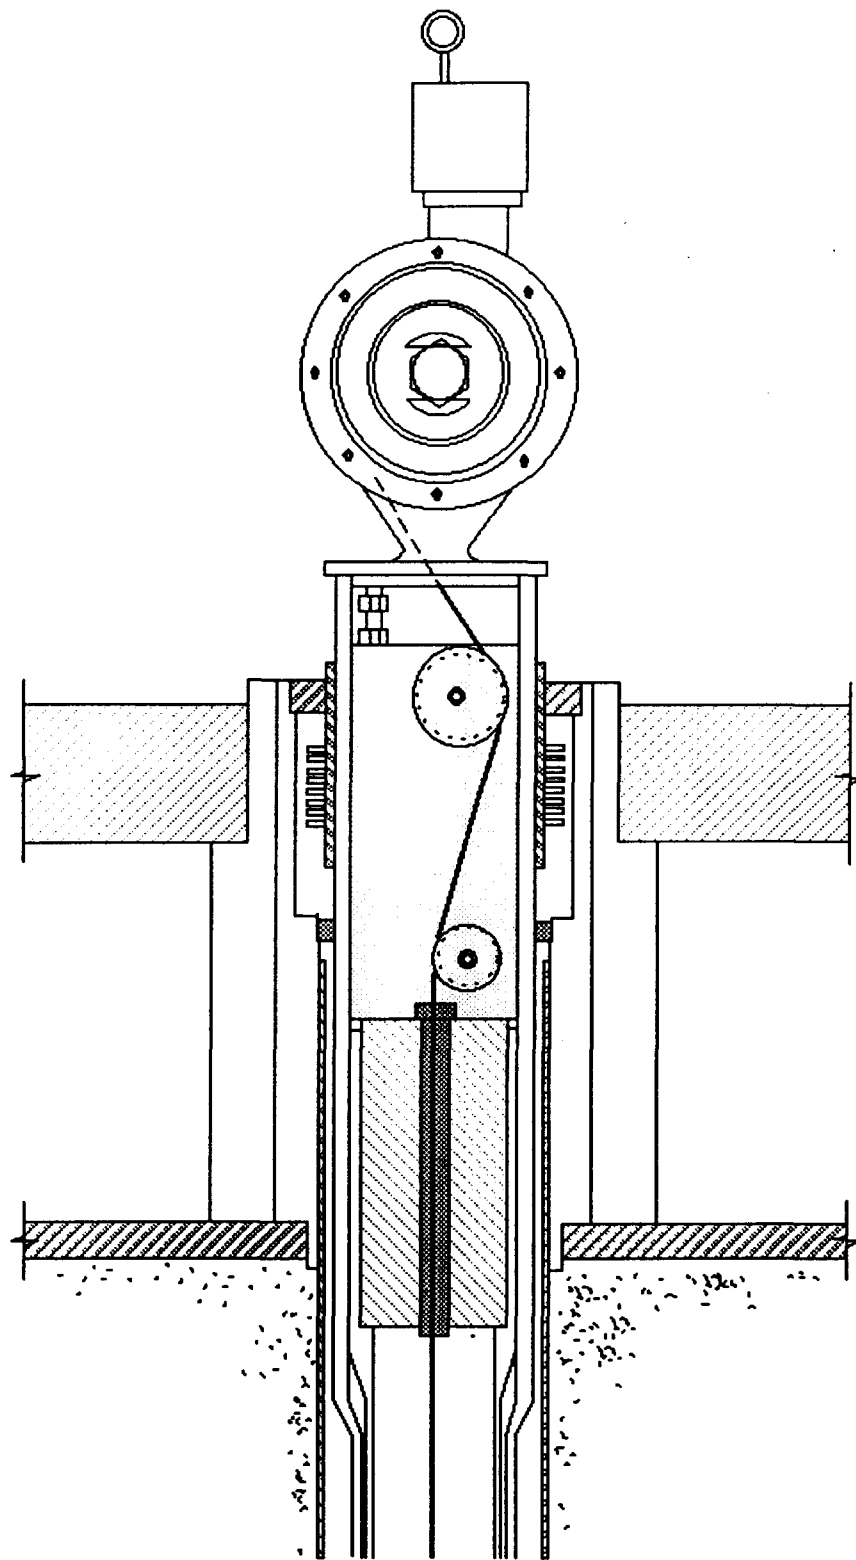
Adjuster Unit Penetration Shielding Arrangement
